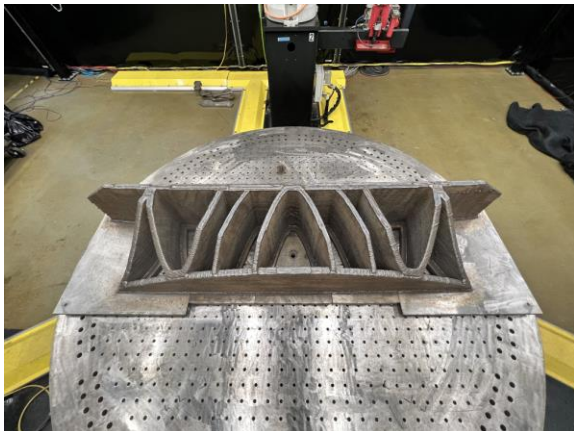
Back top view of the mBAAM cross beam at the end of the print.
